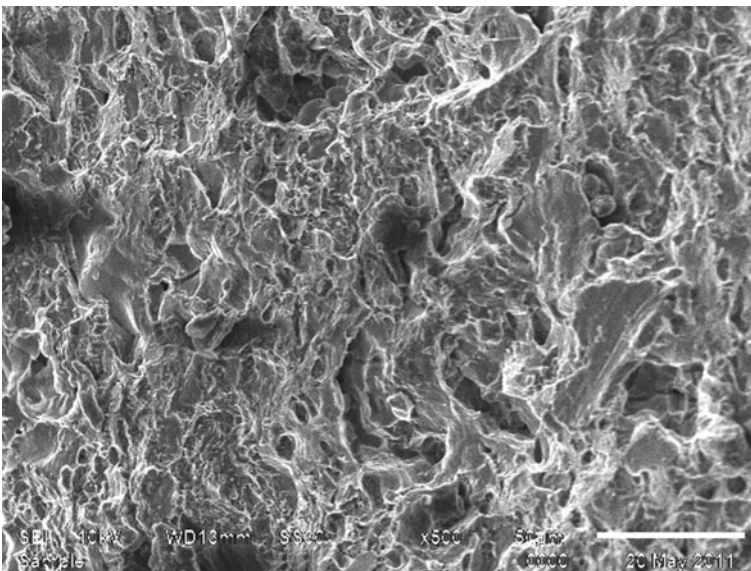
Tensile test specimen fractograph at current (160 amp)
